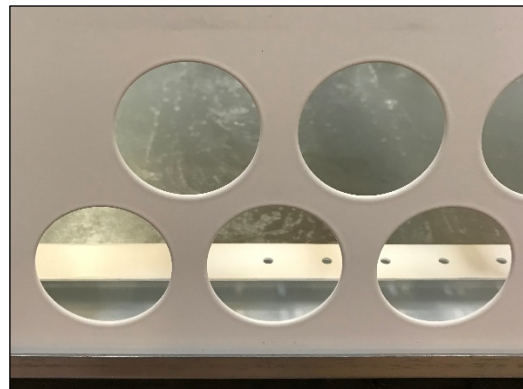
Unopax manifold cabinet with prefabricated pressed holes for bushings
